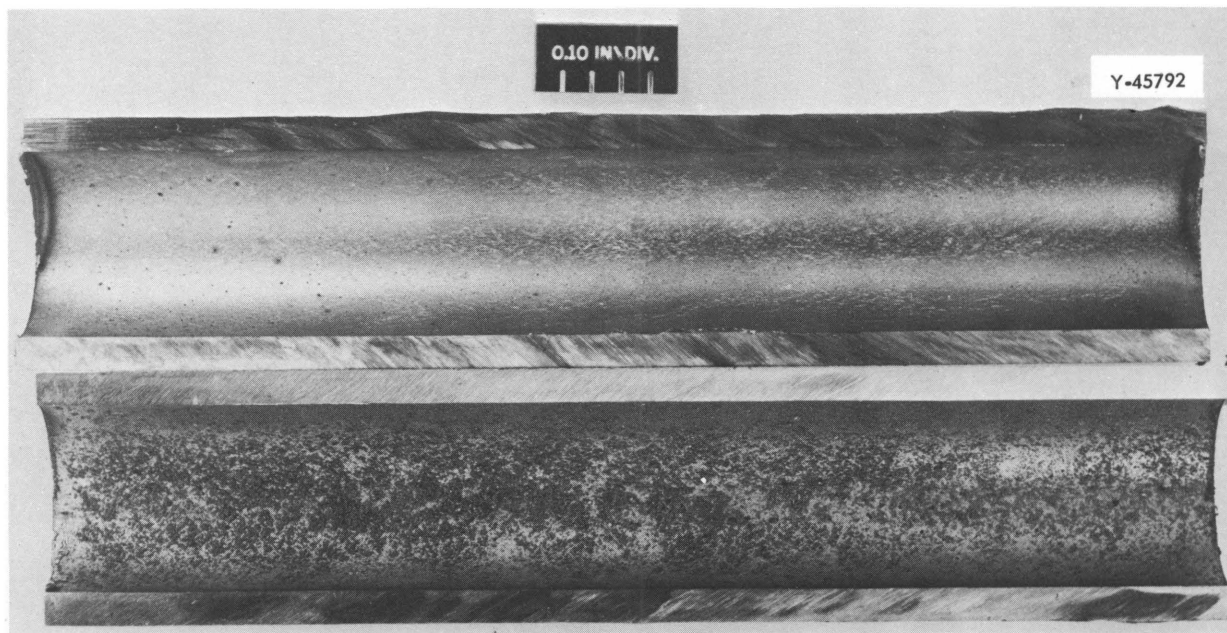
Enlargement of a Portion of Center Piece Shown in Fig. 21.
